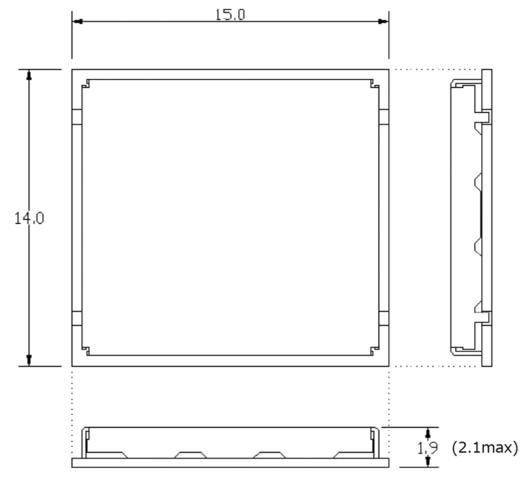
dimensions of the module (TOP VIEW) (unit: mm)
